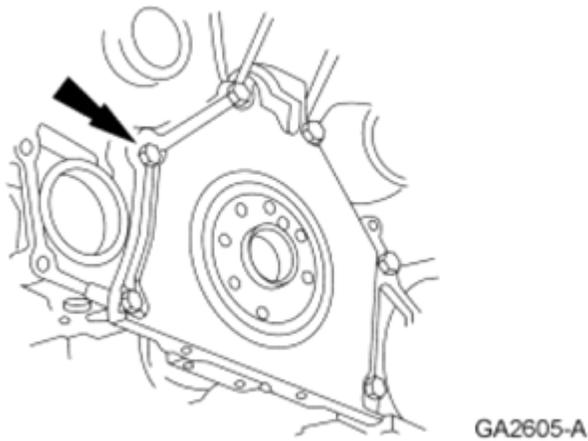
Locating Crankshaft Rear Seal Retainer Plate And Bolts
